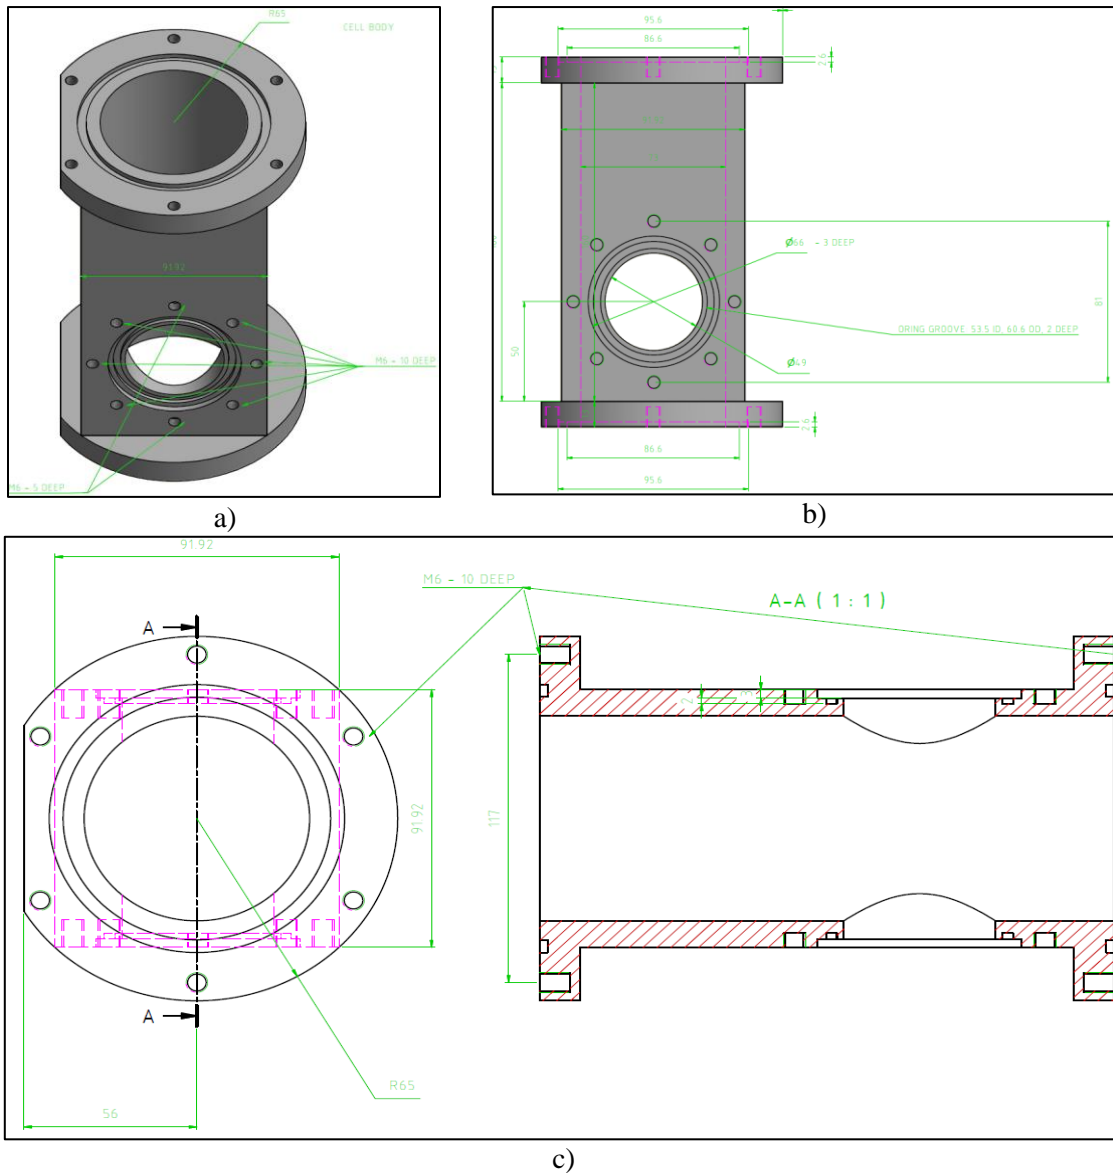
Drawing of the cell body: a) top flange and viewing windows flange, b) cell body front view, c) top flange with the groove and bolt locations (3-D drawings drawn in Autodesk Inventor by Dr Nelson, 2017).
